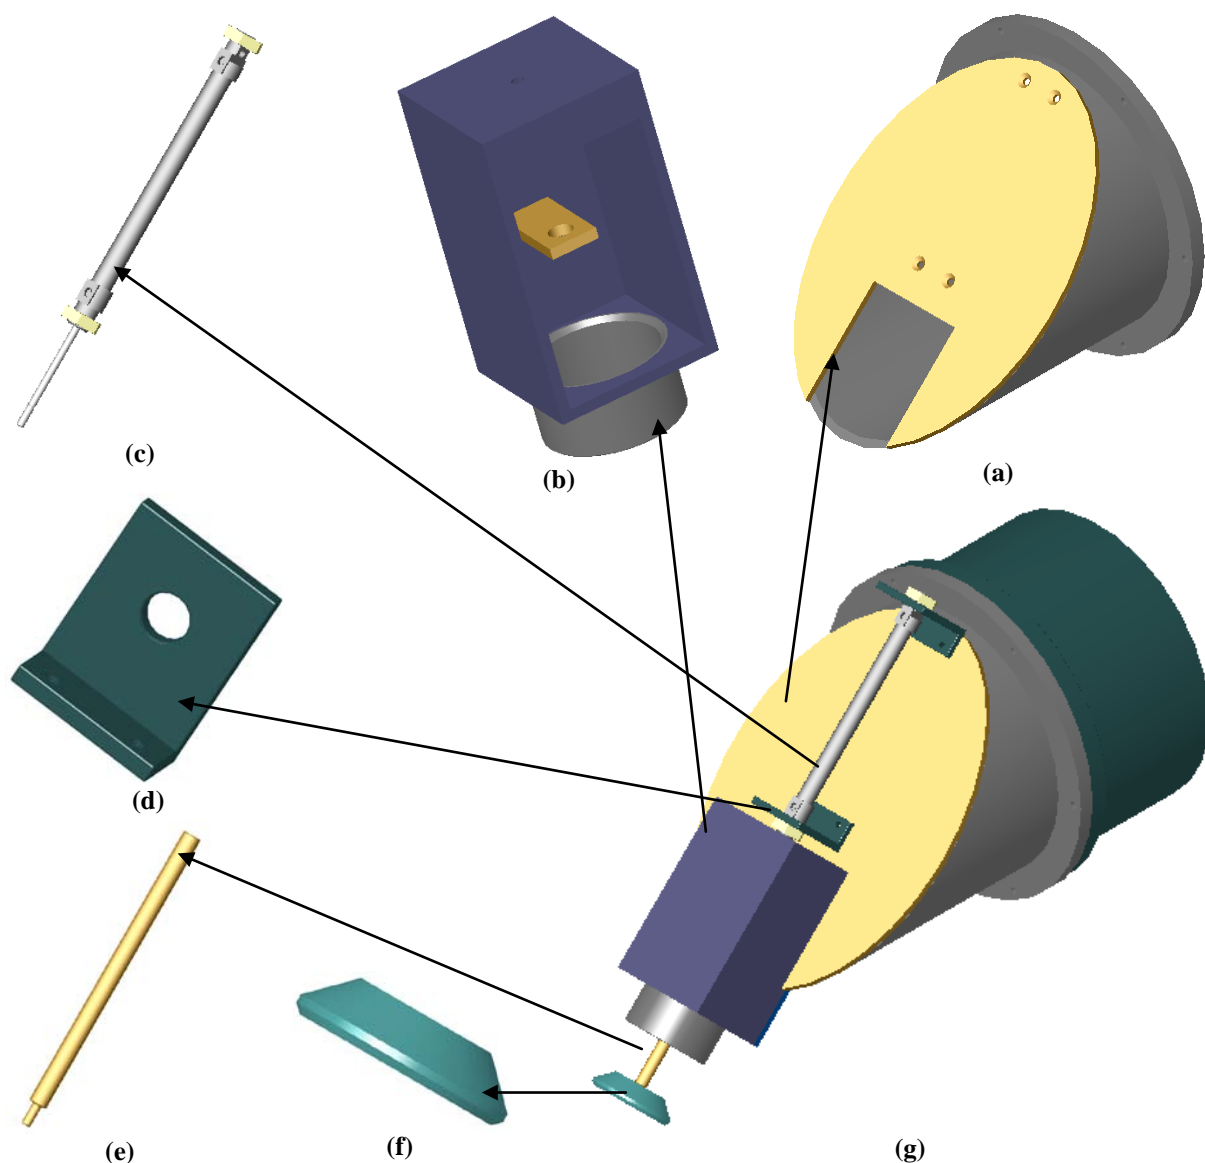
, Embodiment for the valve mechanism with 6 major components (a) Perspex discharge port, (b) valve body, (c) pneumatic actuator, (d) actuator mounting, (e) extend rod, (f) valve, which combines and forms the valve mechanism in (g).
